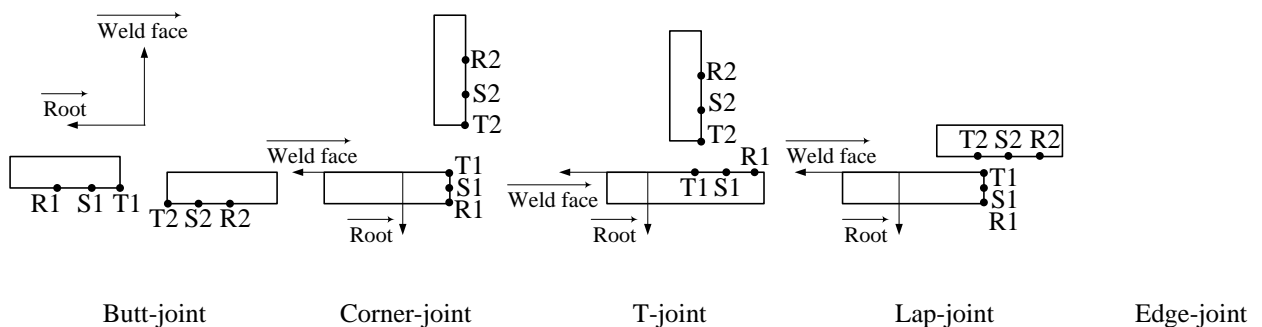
Breakpoint position before welding on the weld face and back bead for workpiece geometries with different joints and the welding direction into the paper. At the weld face side, T1 and T2 are not placed at joints where the groove type influences the position. Profile sensing is not made at the back bead of the edge-joint because no extra information is achieved.
